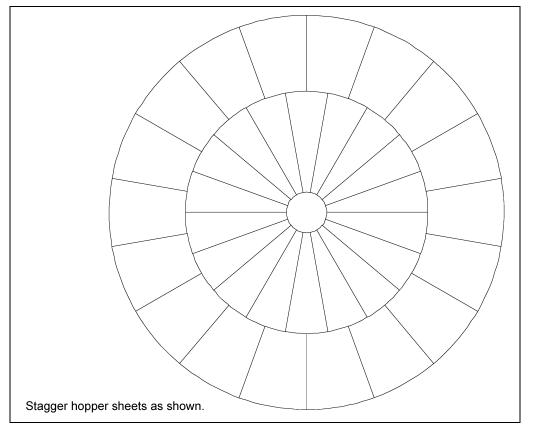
C 18' and 21' Two Piece Hopper Overhead View of 18' 45 o and 21' 45 o Hopper Sheet Assembly
